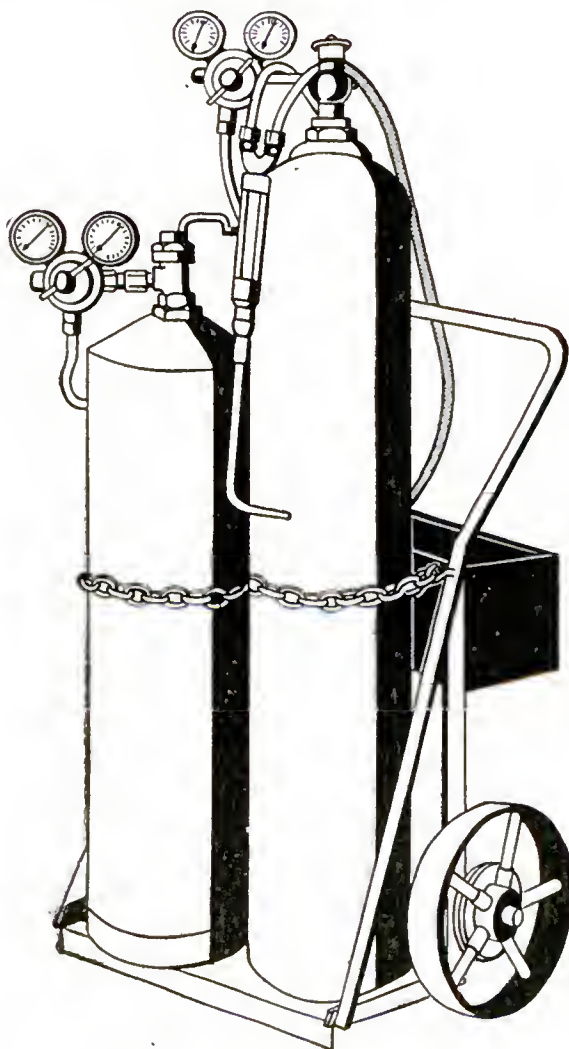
Portable oxyacetylene welding outfit.
